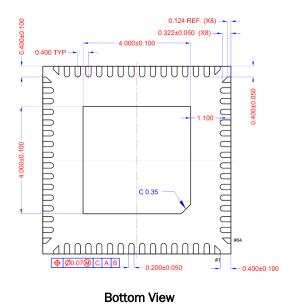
Olympus QFN64 Bottom View Mechanical Drawing
